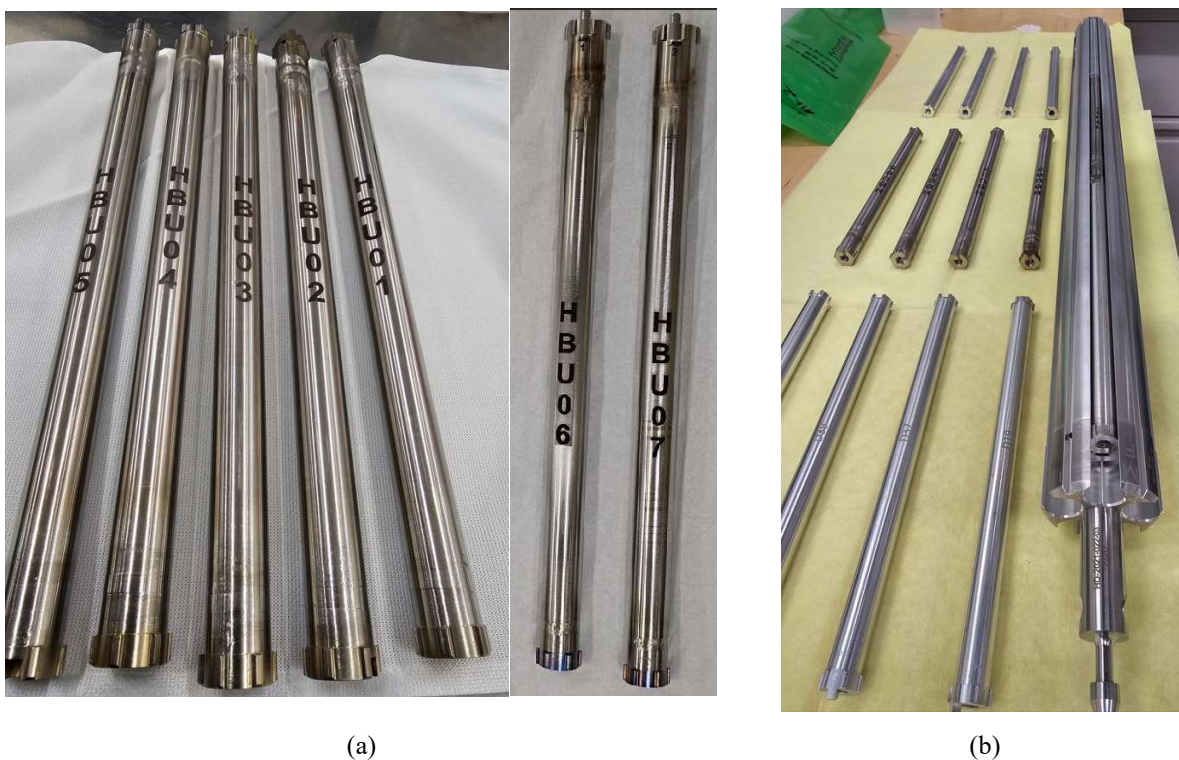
MiniFuel targets fully assembled (a), and RB basket assembly parts layout (b) with fueled targets, dummy targets, and RB basket.
